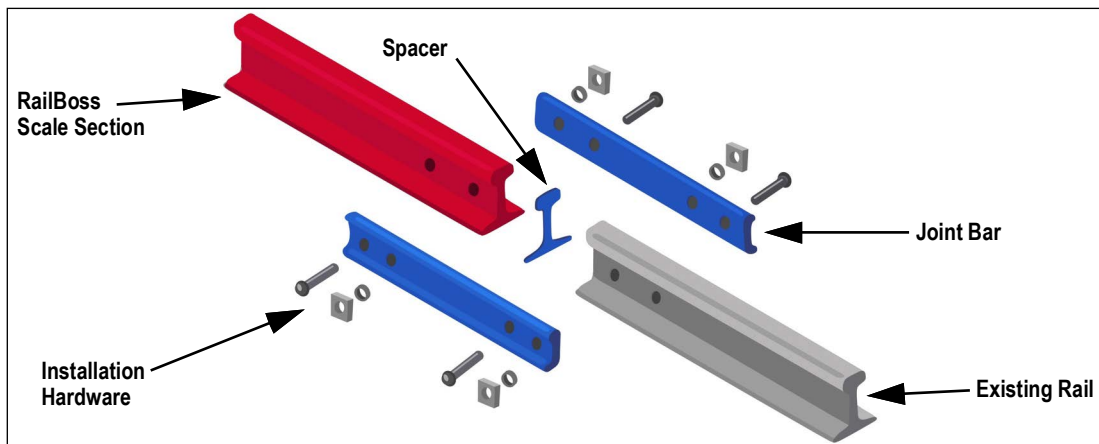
Installing RailBoss Scale Sections to Existing Rail
